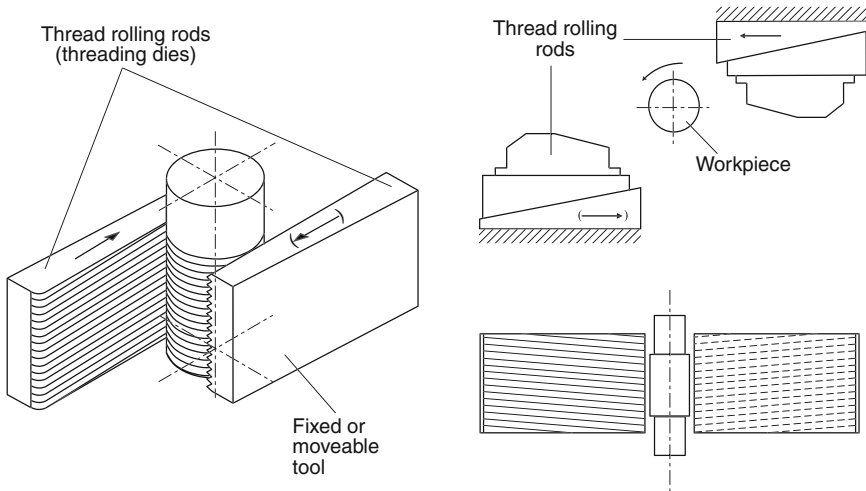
Thread rolling with flat die tools [VDI89]
